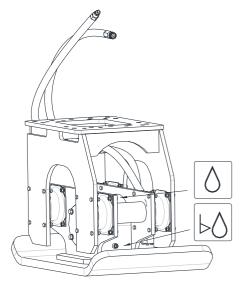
Bearing Oil Fill & Level Plugs Identified
